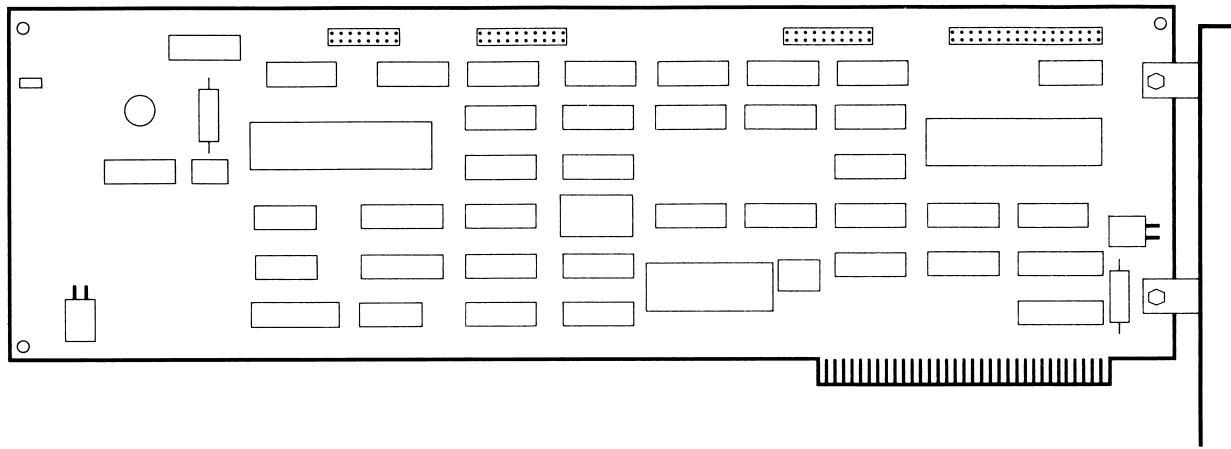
Full-Length Fixed Disk Drive Controller Board (WD1002WX2 or HX4).
